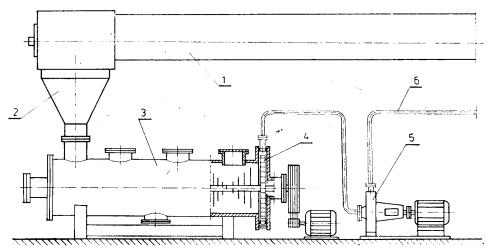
Diagram of apparatus for transportation of undiluted carbonatation mud: 1 — helical conveyor, 2 — chute, 3 — desintegratin mill, 4 — inner pump, 5 centrifugal pump, 6 — pipeline
